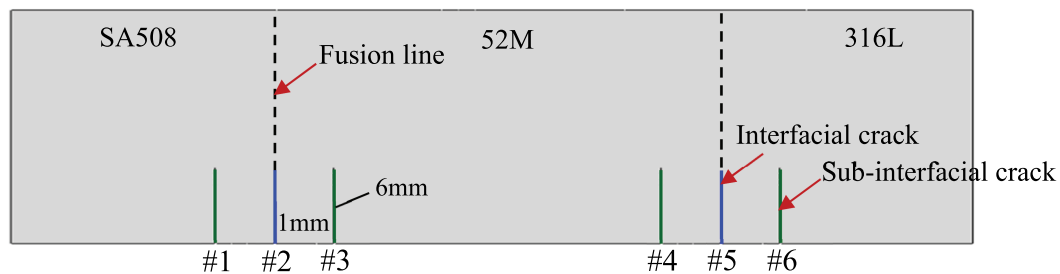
Schematic diagram of crack locations in a welded joint.
